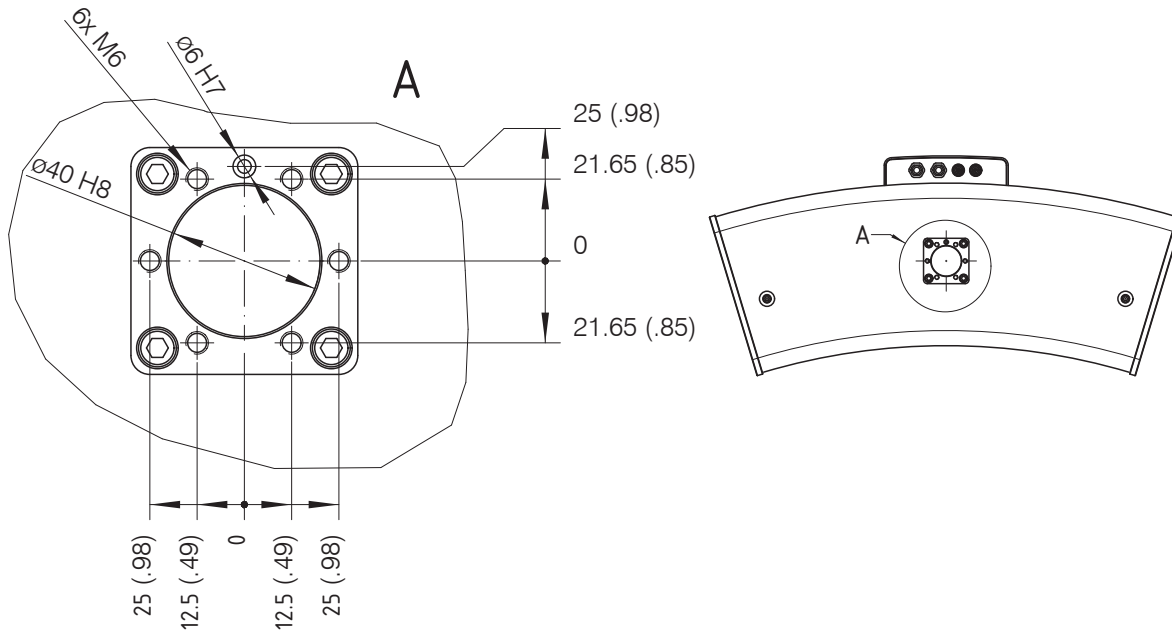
Mounting dimensions of flange adapter, dimensions in mm (inches, rounded off)
